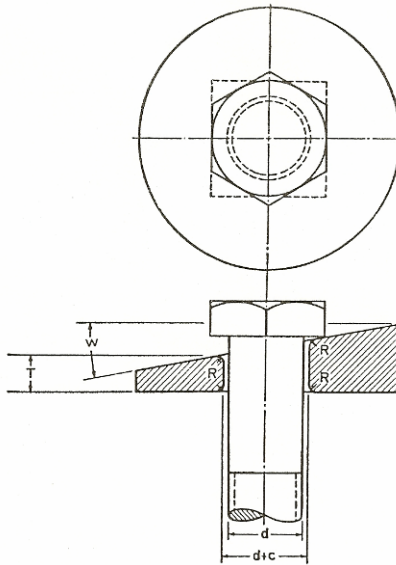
Wedge Washer (ASTM F606-05; ASTM A370-05)
